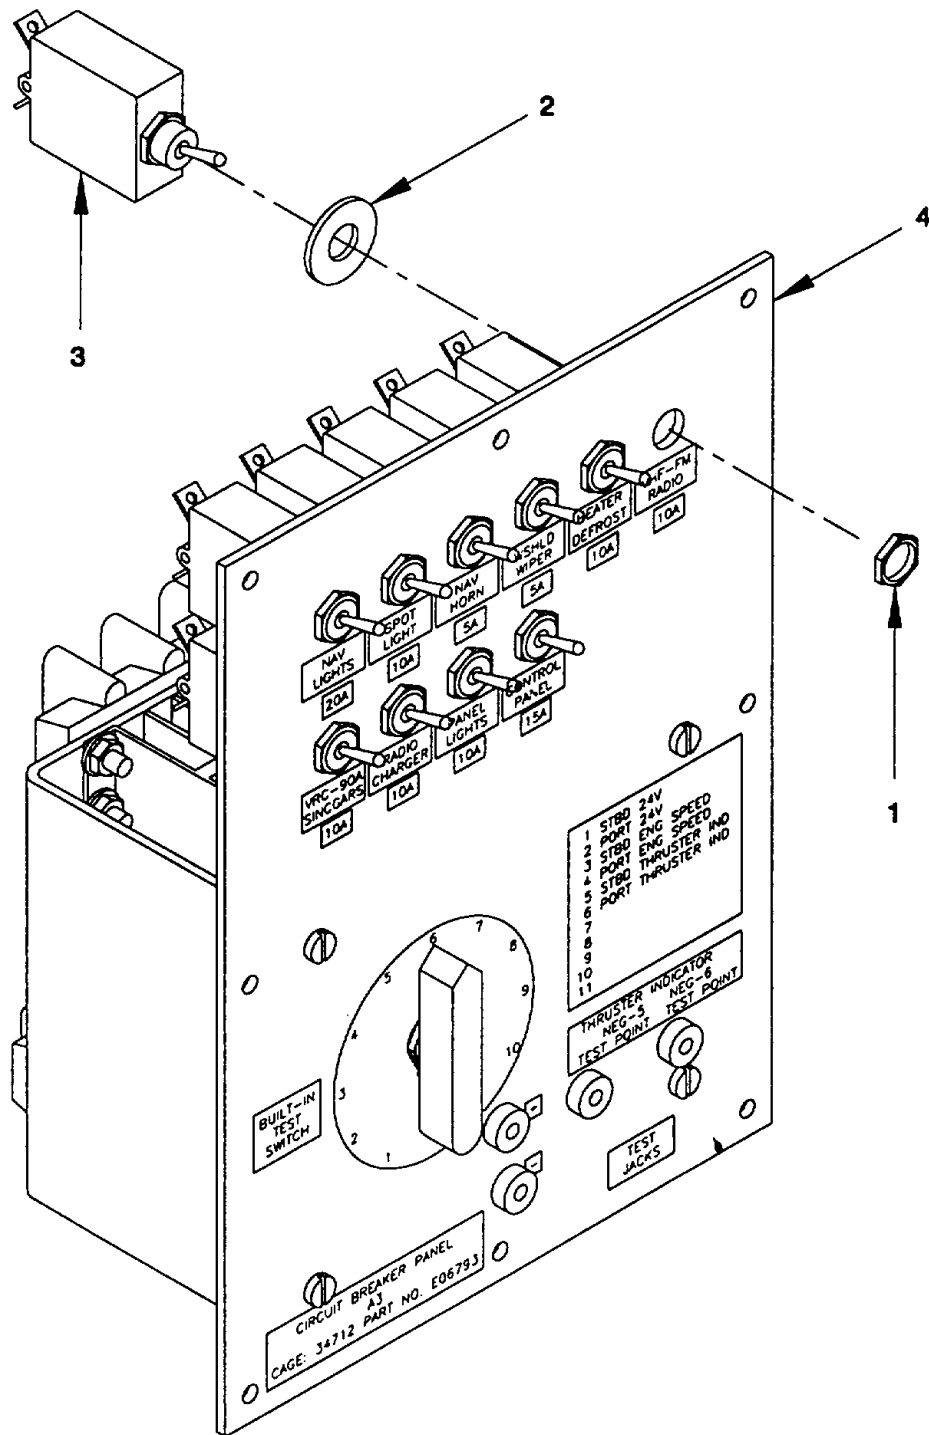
Circuit Breaker, Operator's Cab Circuit-Breaker Panel "A3", Remove/install.
